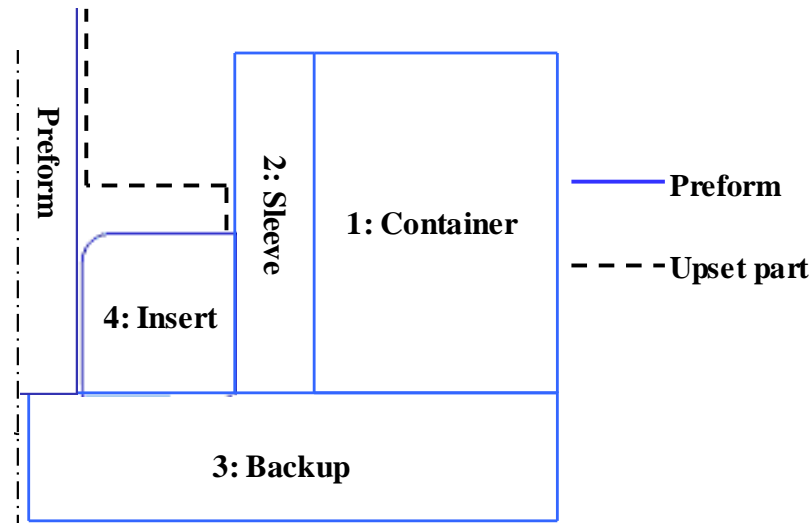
Schematic representation of the warm forging (upsetting) die assembly.
